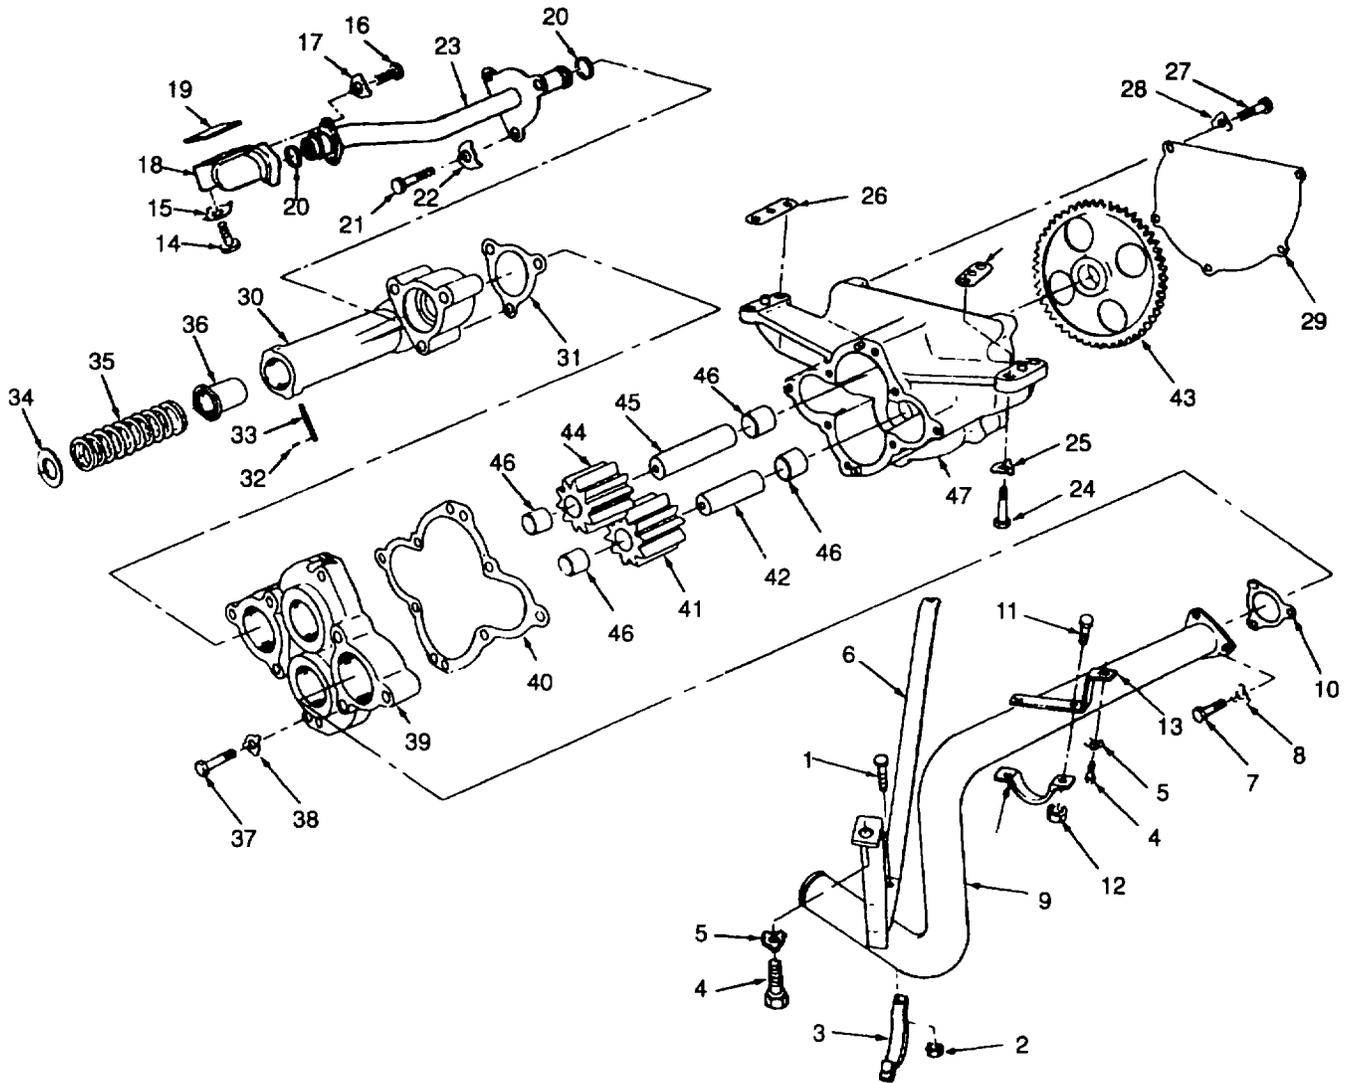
Lubricating Oil Pump, Exploded View (Sheet 1 of 2)
